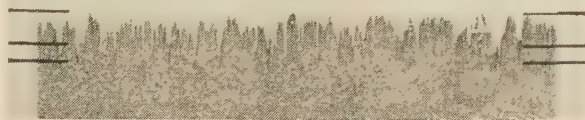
TAPER SECTION OF CYLINDRICAL SURFACE FINISHED BY SANDPAPERING
